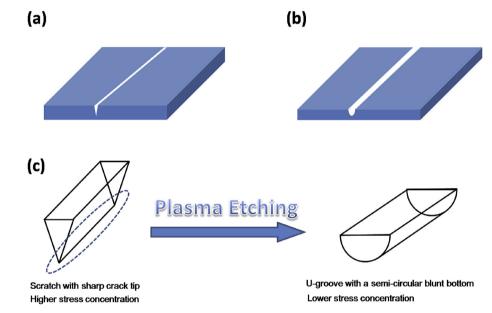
Typical serious defect introduced by mechanical grinding: (a) Sharp crack tip on the wafer before dry etching; (b) U-groove forming after dry etching; (c) schematic illustration of the plasma etching effect on the defect. Adapted from Ref. [38].
